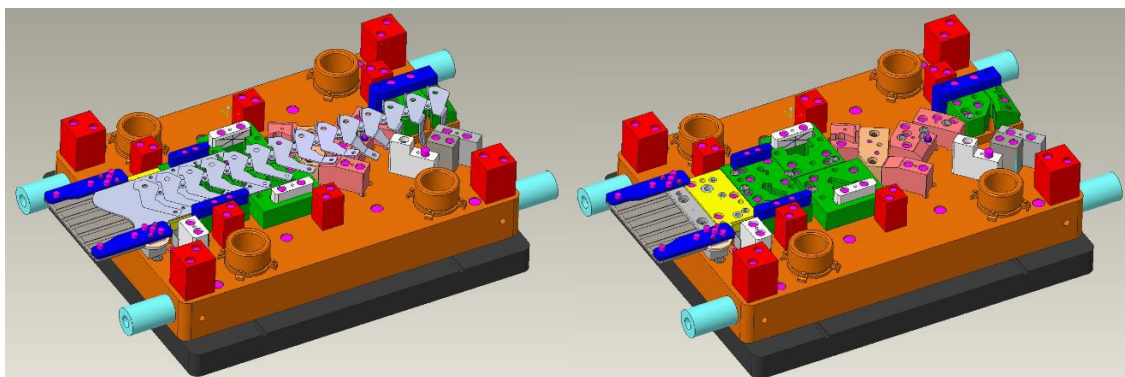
Left – progressive die bottom plate with strip layout; right – without strip layout
